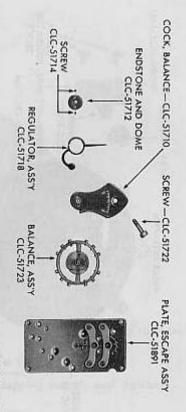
Message Center Clock MI — Escapement and Balance Assembly Removed From Train Plate
